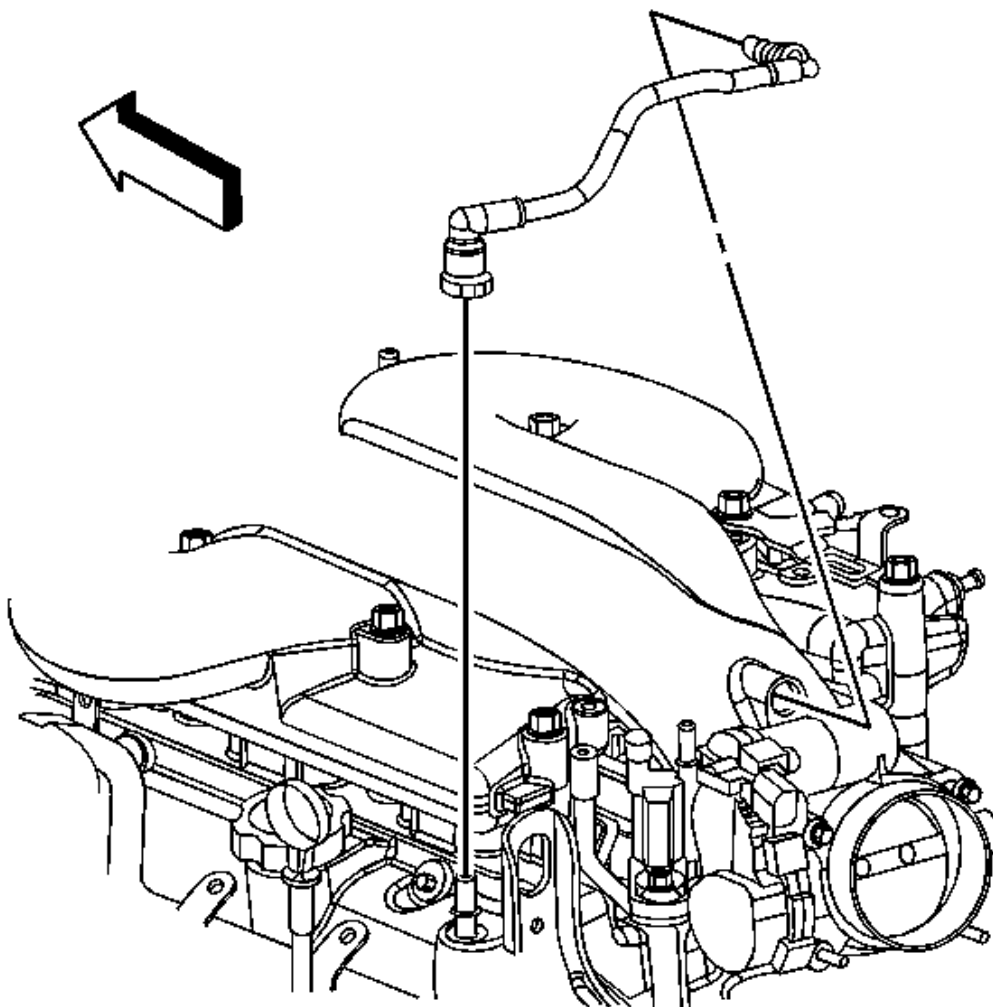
Identifying Positive Crankcase Ventilation (PCV) Foul Air Tube
